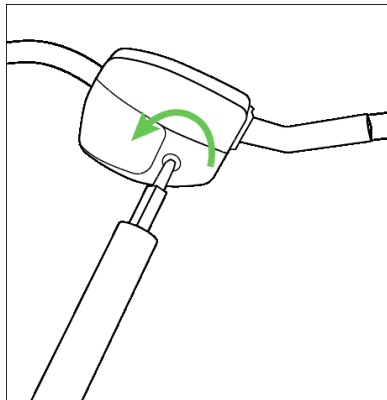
Removing the cover of the bracket that connects the headpiece to the mouth tube
